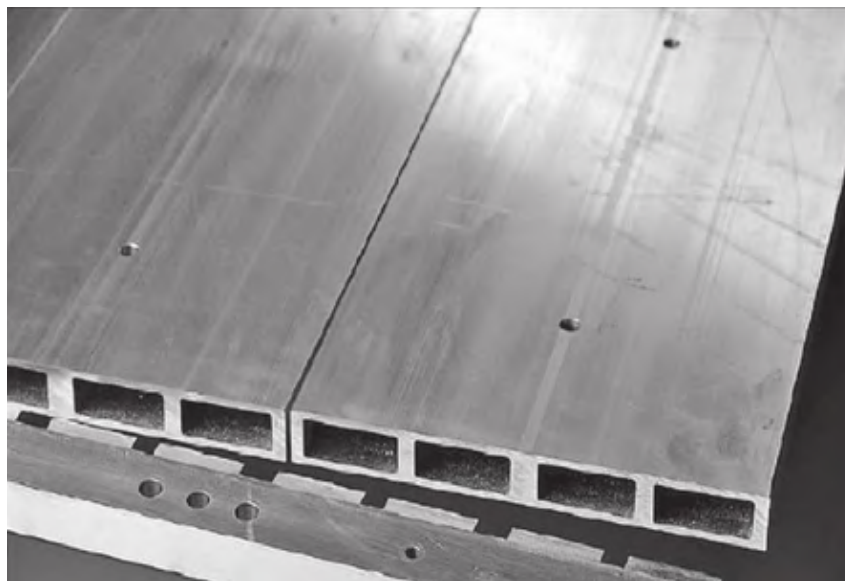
Joint design of Sapa's freezer panels (weld penetration 4.5mm, total weld length 16m) for quick fish freezing on fishing boats [37].
